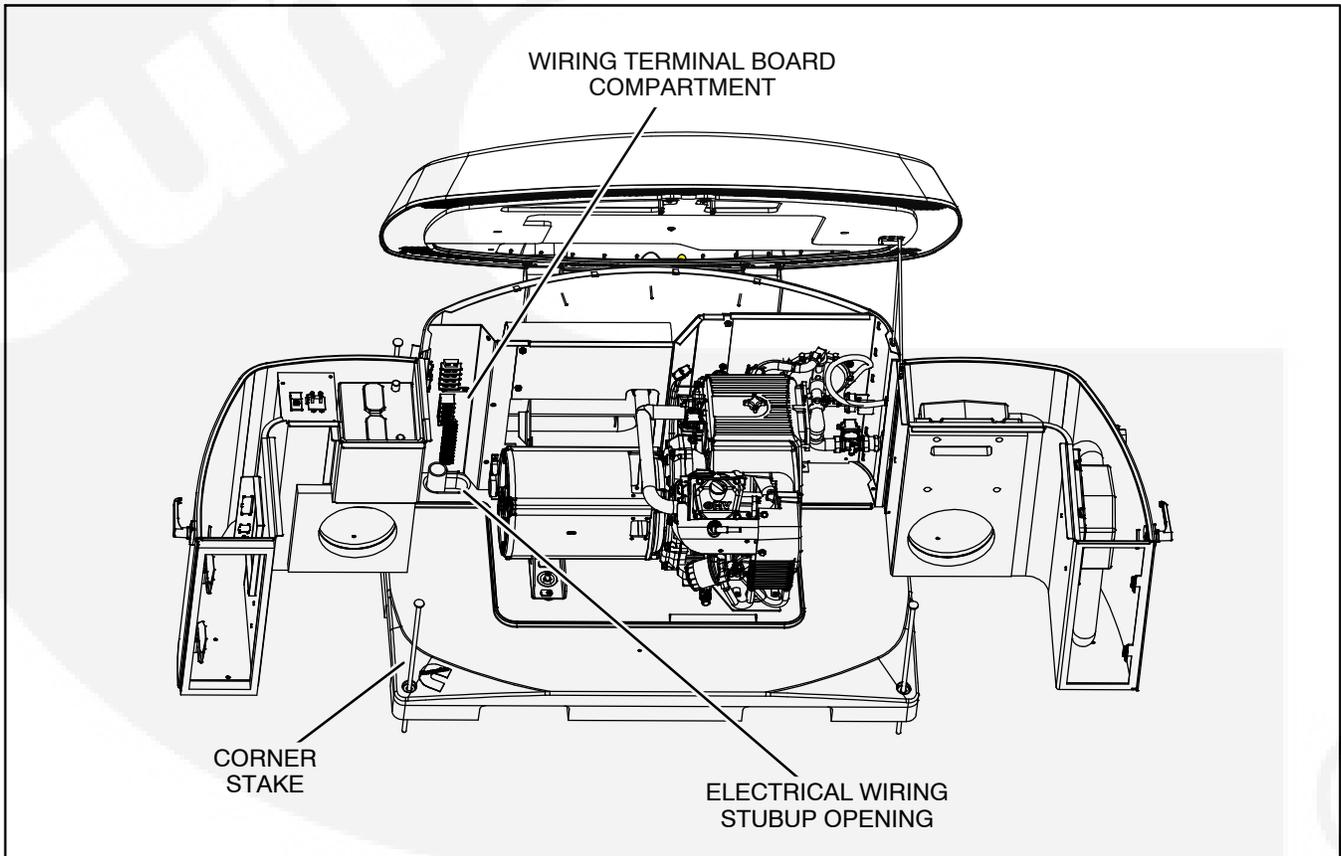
ELECTRICAL WIRING TERMINAL BOARDS AND STUBUP OPENING
